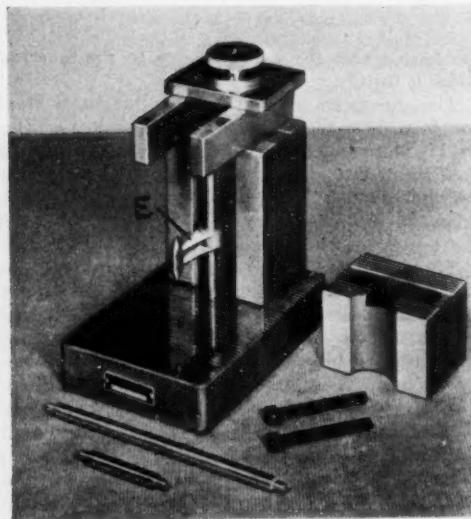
View of the Stand, Showing the Lower Flexible Support Arm which can be Adjusted and Clamped on a Vertical Rod
